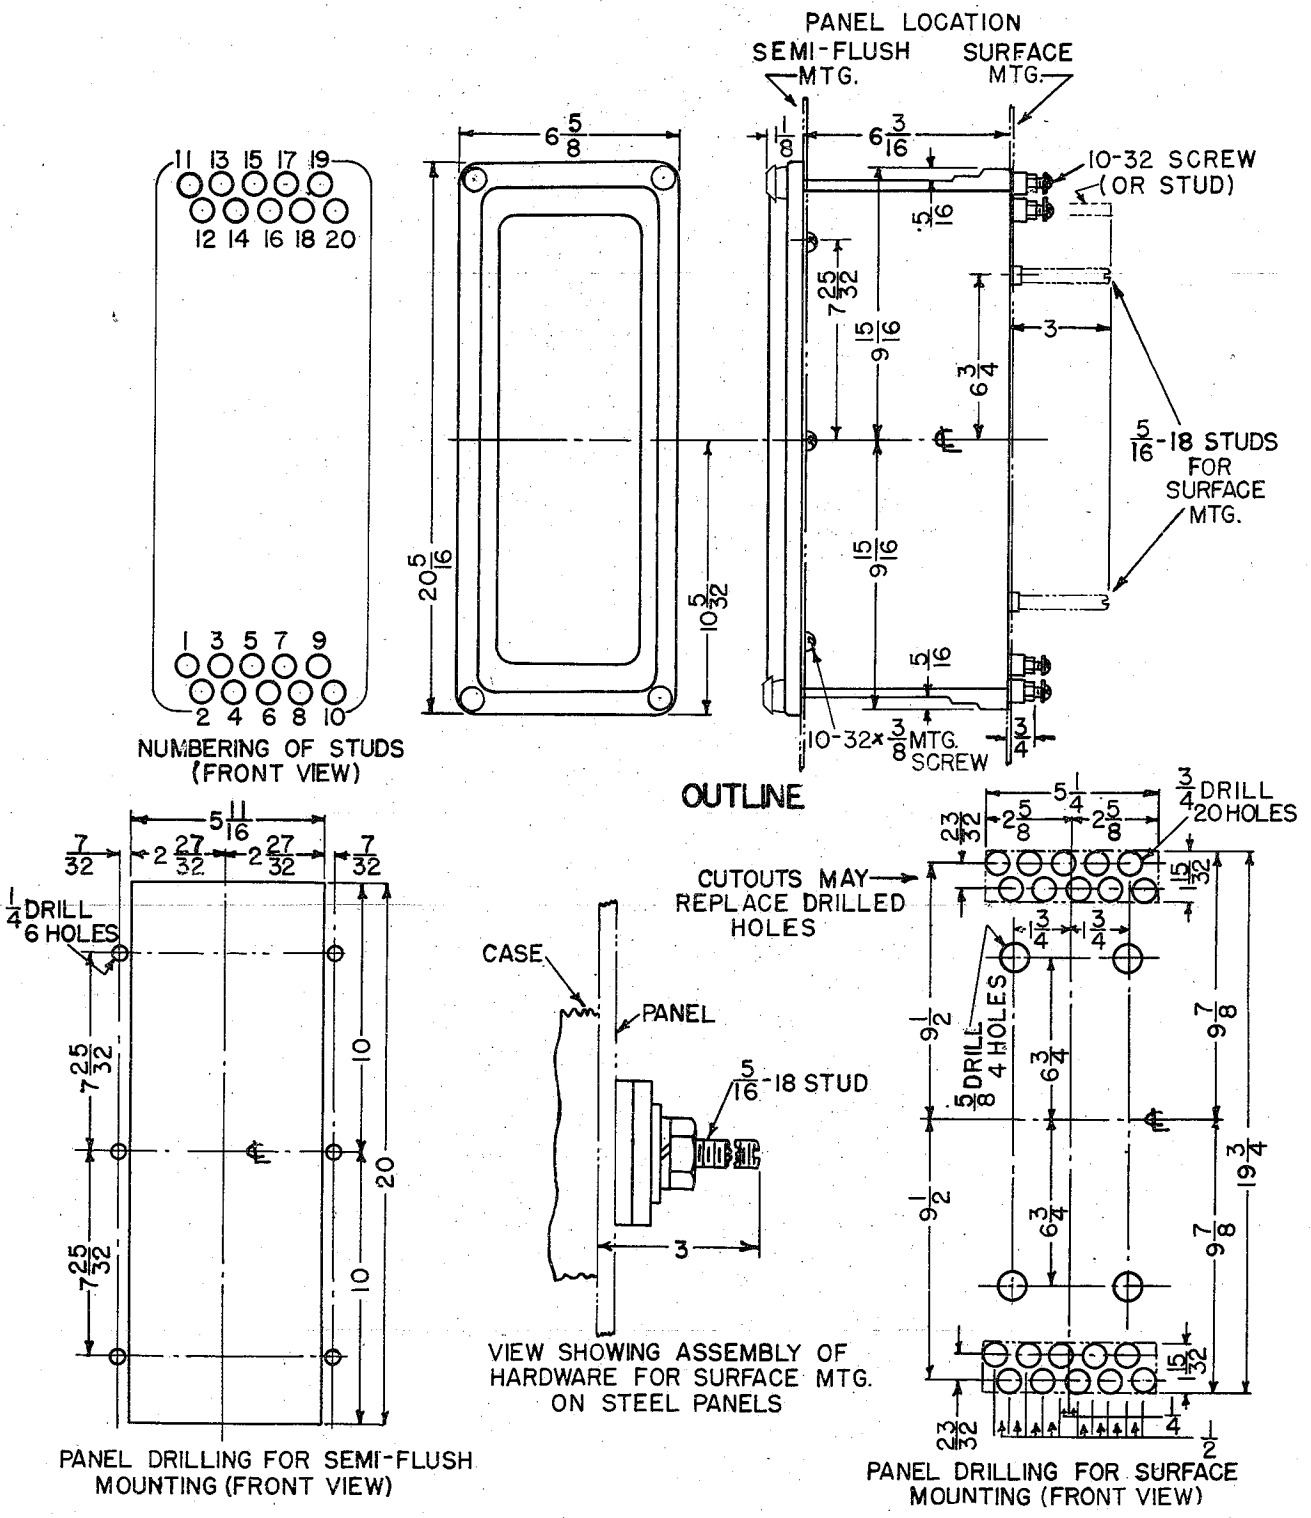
Outline and Panel Drilling Dimensions for Type ICC21C and ICC28A Relays
